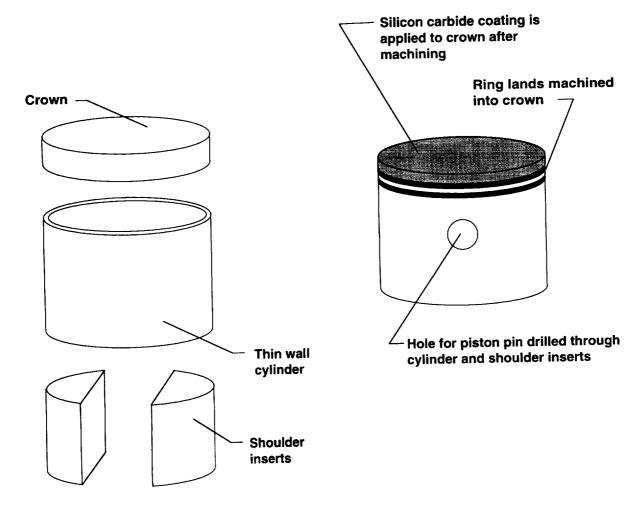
Carbon-carbon piston fabrication using conventional composite-material hand lay-up method.
